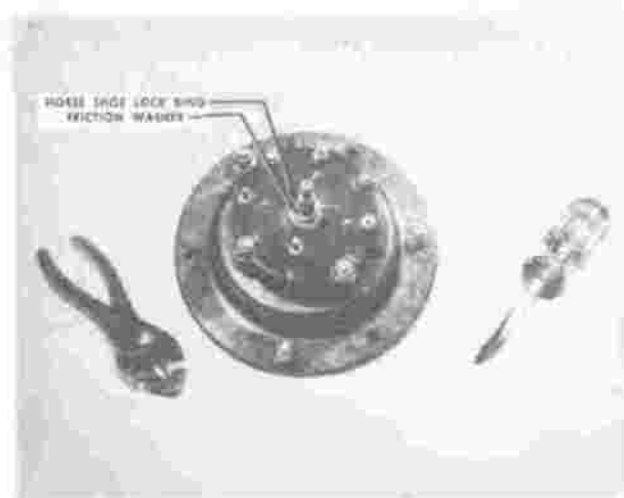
(Sheet 1 of 2) — Assembly Procedure of Heater Control Unit (Forward and Aft)
